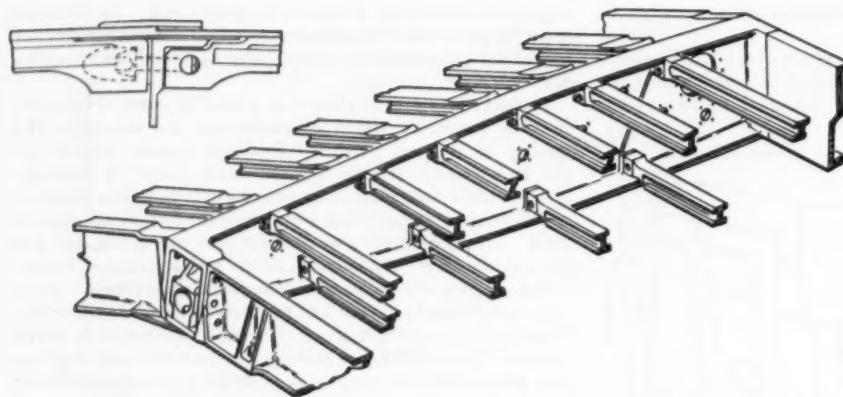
INSTALLATION OF WING-ROOT BULKHEAD
